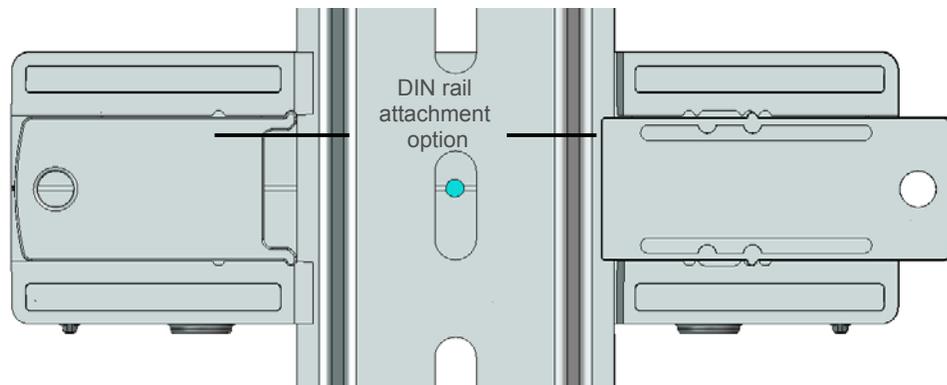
EZ863 Terminal rear view 3 – DIN rail attachment lock on DIN rail
